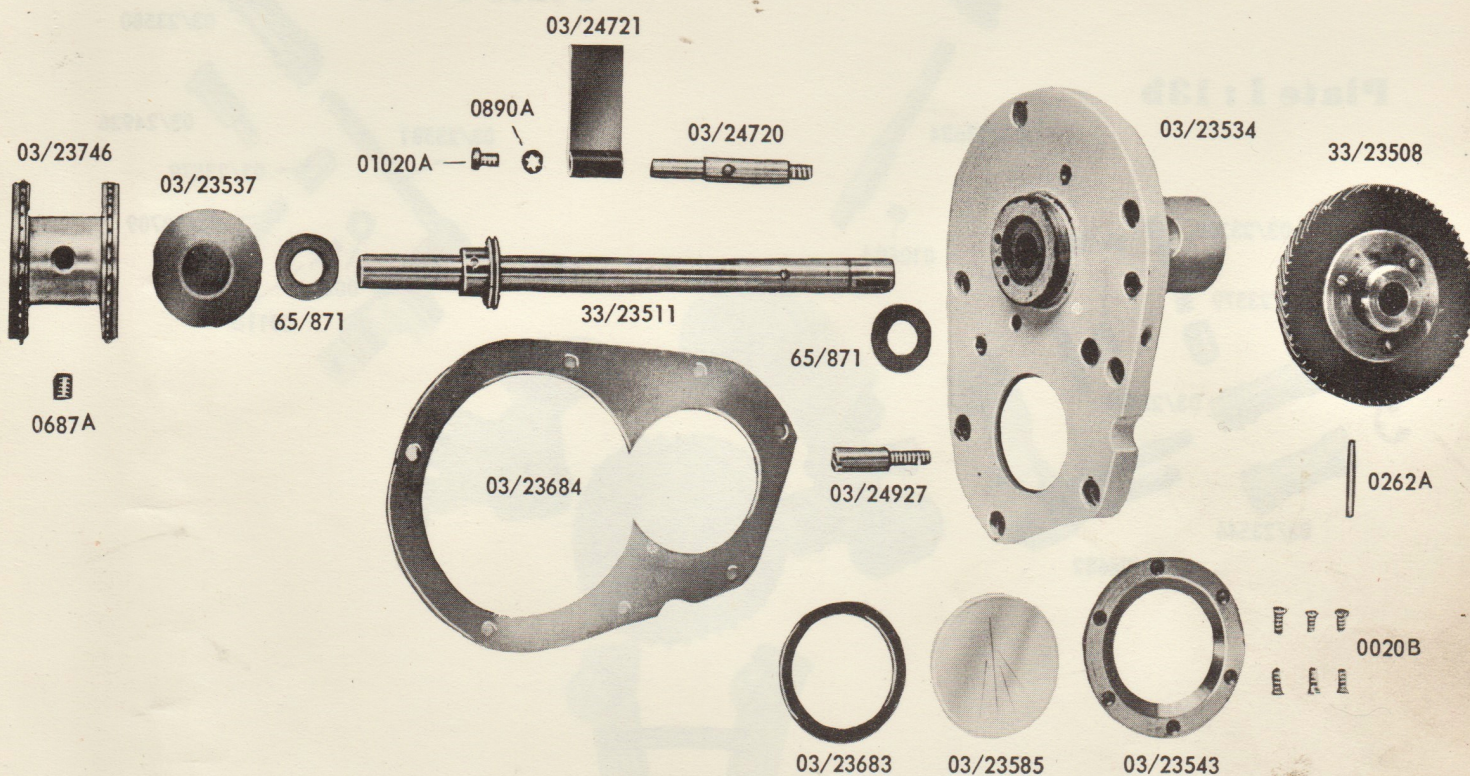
BOTTOM SPROCKET UNIT LESS ROLLERS
